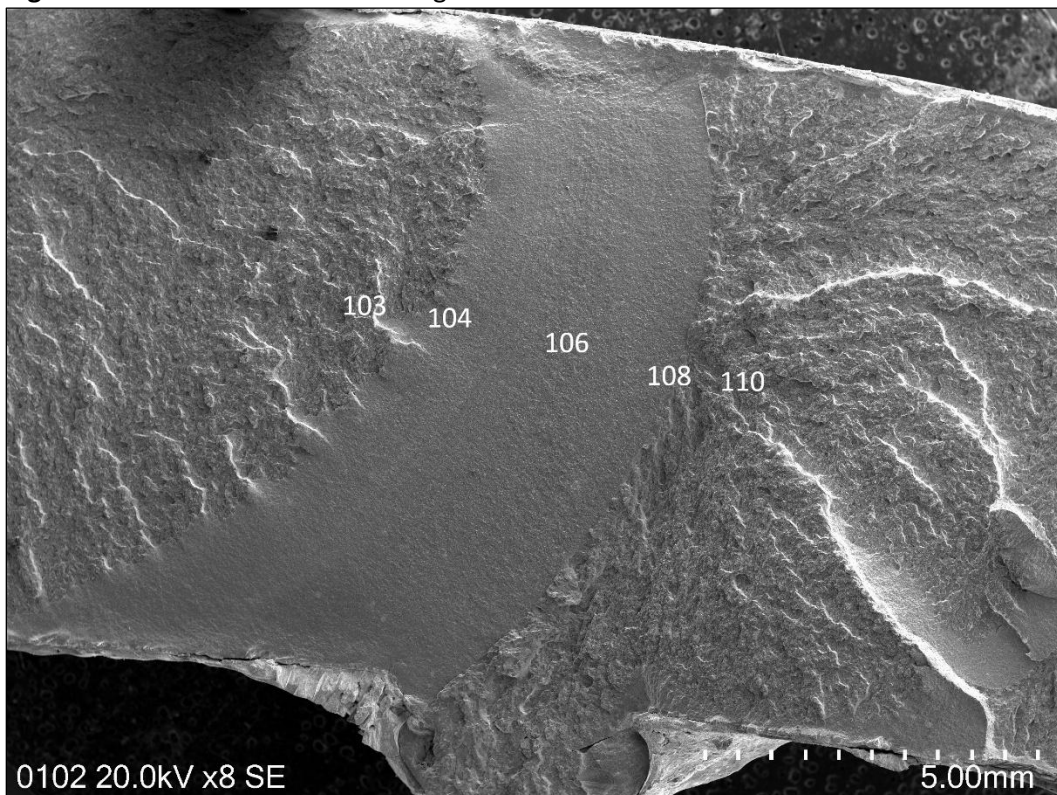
Fatigue zone starting at brittle fracture arrest in weld metal HAZ
